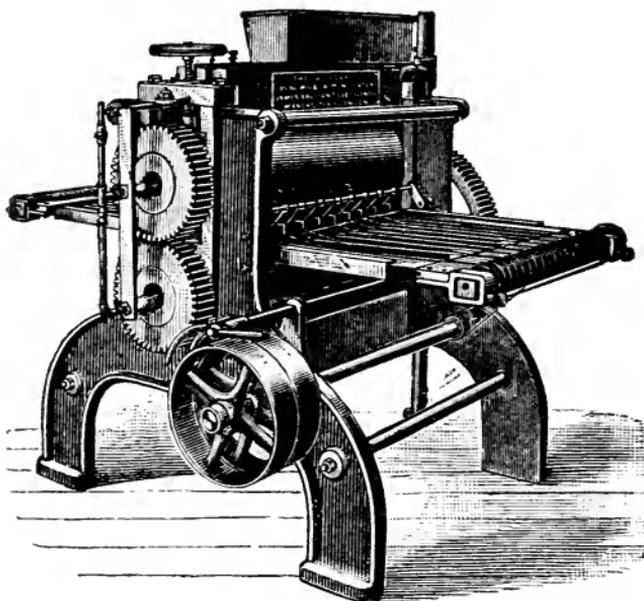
Duncan & Salmon's Hot and Cold Rolling Machine.
